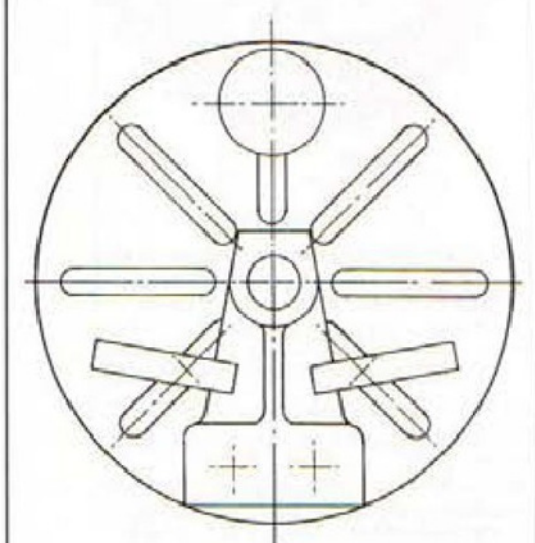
Set one inch bore on centre line and machine to size (both castings).
